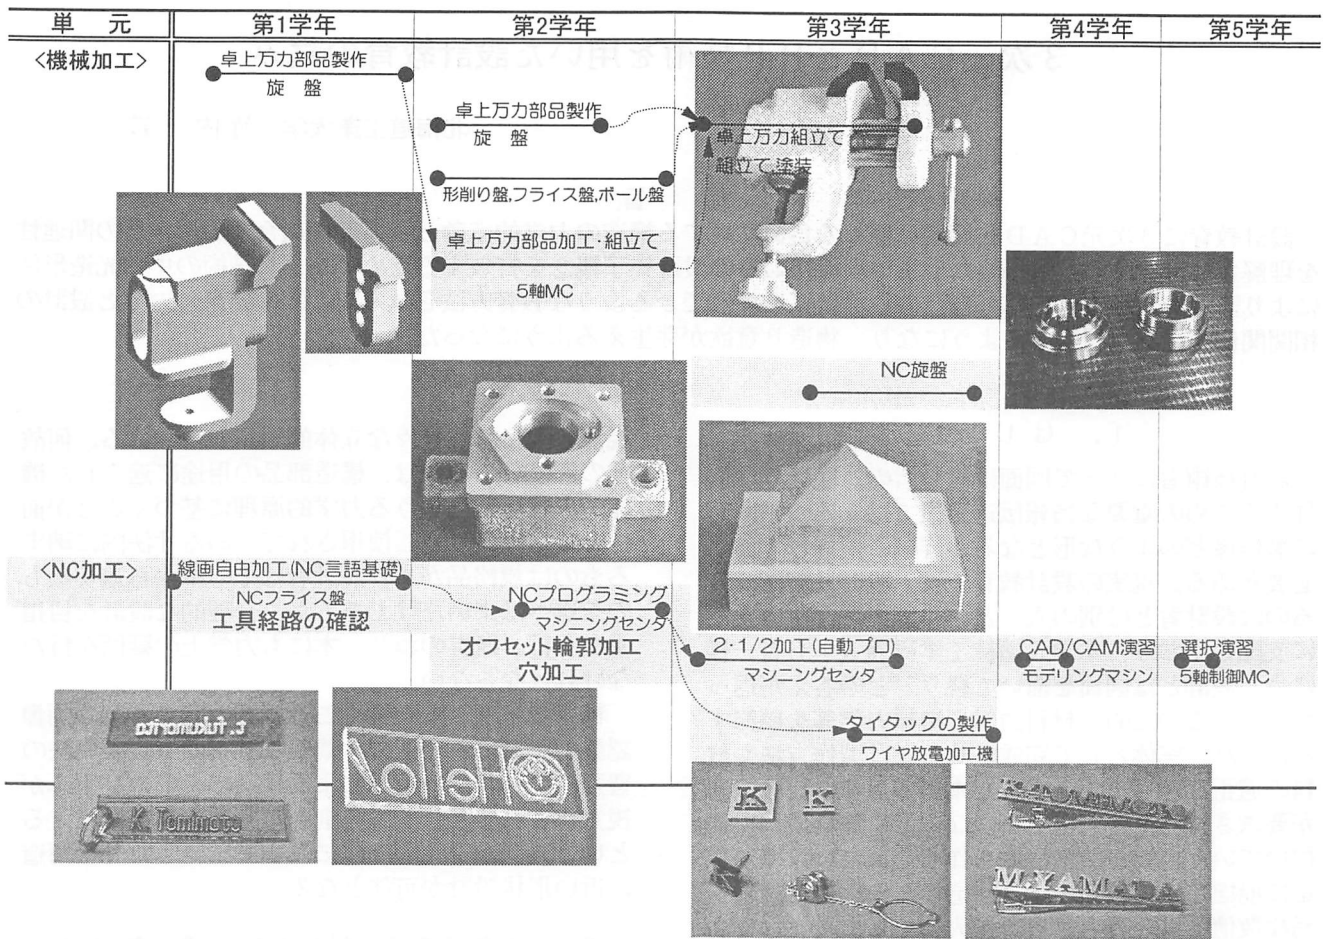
Curriculum of Manufacturing Practice for NC and Example of Workpieces
